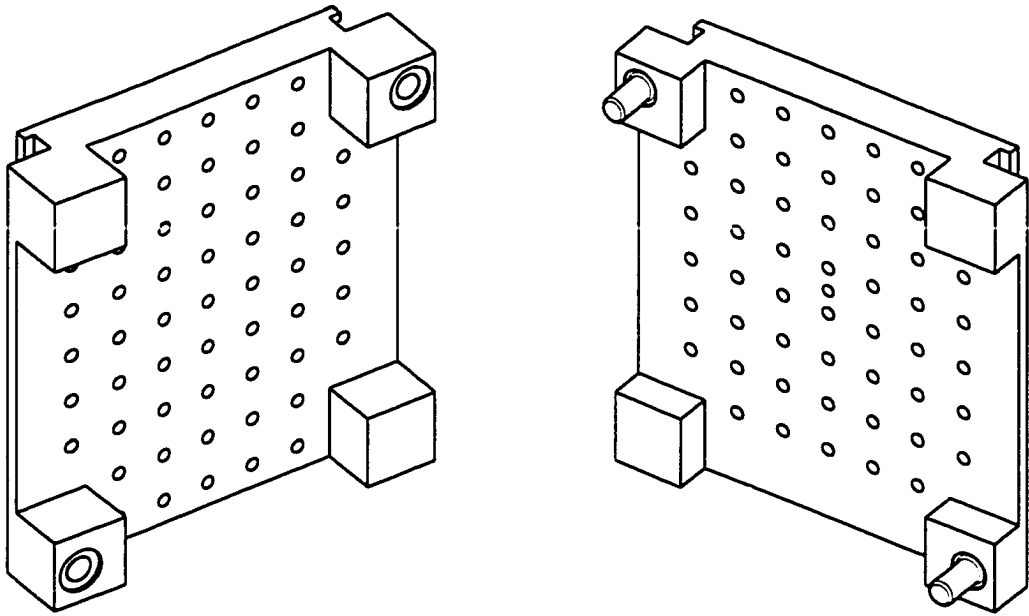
Front of plate B (left) and plate A (right), after machining.
